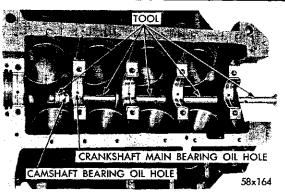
Removing the Camshaft Bearing Using Tool C-3132A
